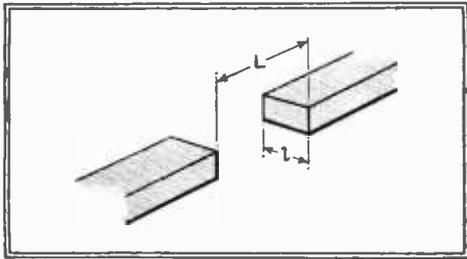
Measurement of dimensions of pole-pieces for estimating deflection.
